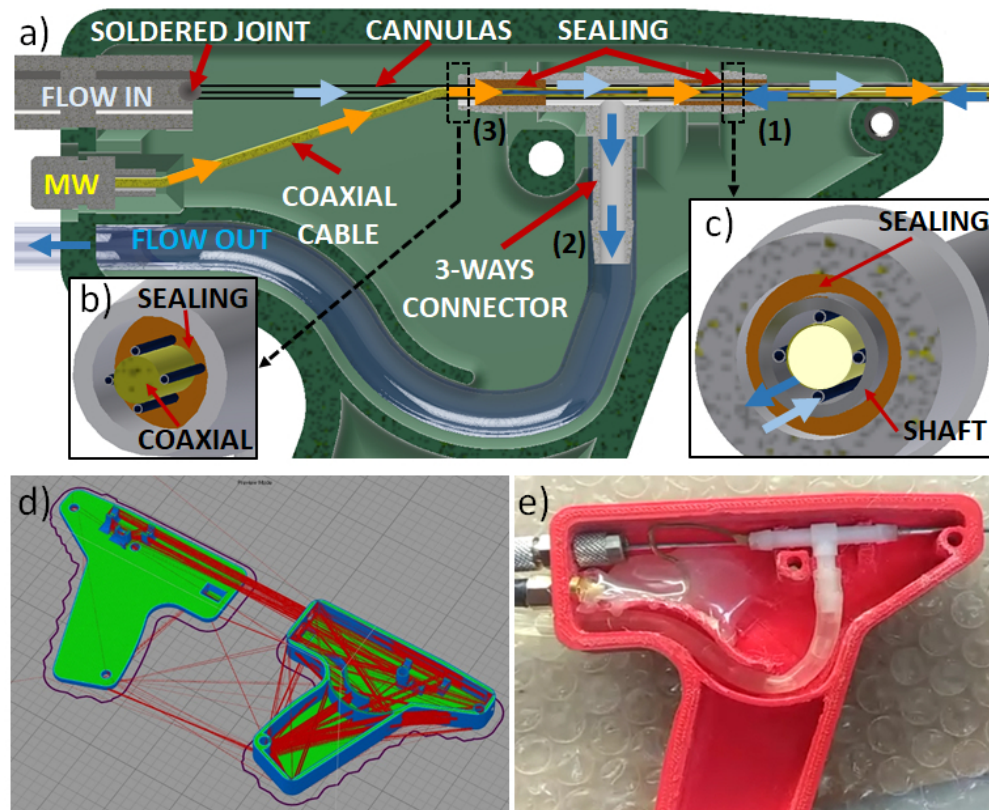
Handling subsystem design. a) General arrangement of inputs and outputs, b) detail of the assembly at interface (3), c) detail of the assembly at interface (1), d) FDM slicing of the two parts of the handling case (software: Simplify3D) and e) detail of the interior of the prototype.
